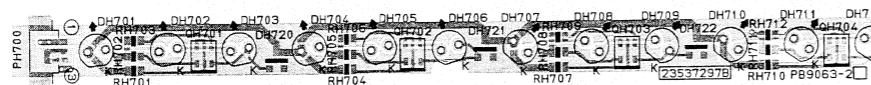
U0032 LED PC Board (Top Side)
